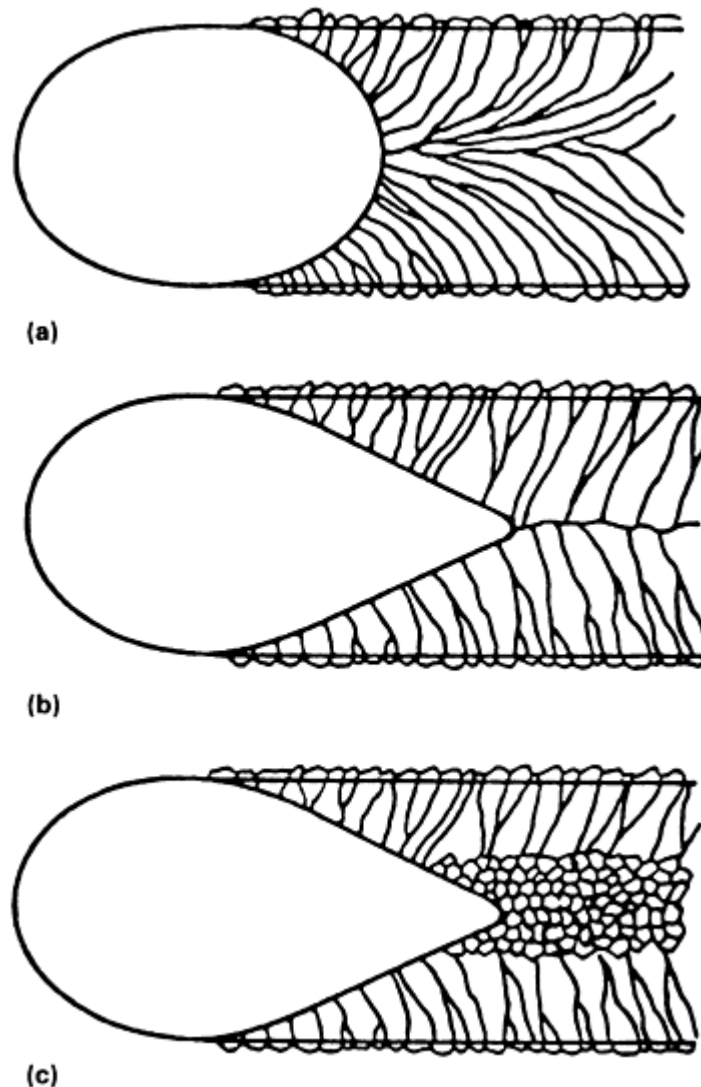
SCHEMATIC SHOWING EFFECT OF HEAT INPUT AND WELDING SPEED VARIATIONS ON WELD GRAIN STRUCTURE. (A) LOW HEAT INPUT AND LOW WELDING SPEED, PRODUCING AN ELLIPTICAL WELD POOL. (B) HIGH HEAT INPUT AND HIGH WELDING SPEED, PRODUCING A TEAR-DROP-SHAPED WELD POOL. HERE, THE HEAT INPUT AND WELDING SPEED ARE NOT YET SUFFICIENT TO CAUSE HETEROGENEOUS NUCLEATION AT THE WELD POOL CENTERLINE. (C) HIGH HEAT INPUT AND HIGH WELDING SPEED, WITH HETEROGENEOUS NUCLEATION AT THE WELD POOL CENTERLINE. SOURCE: REF 13
